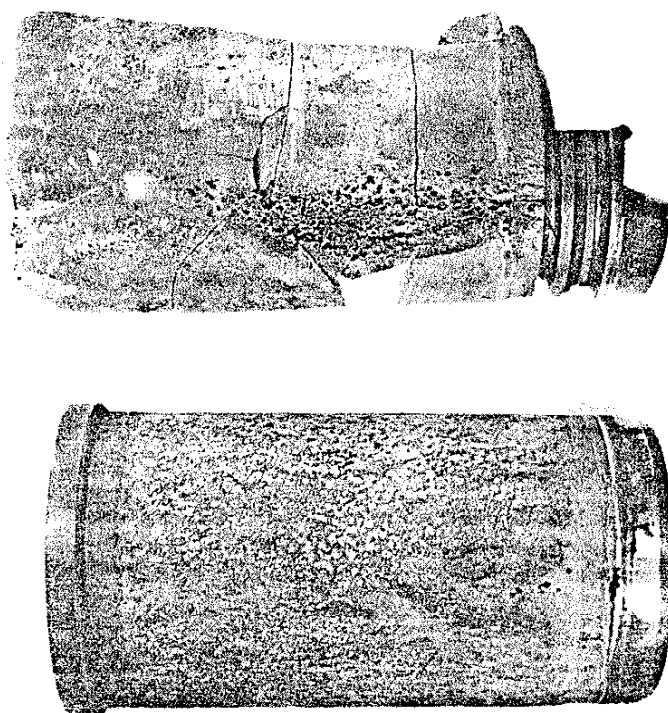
Typical Examples of Cavitation Damage to Diesel Engine Cylinder Liners.
